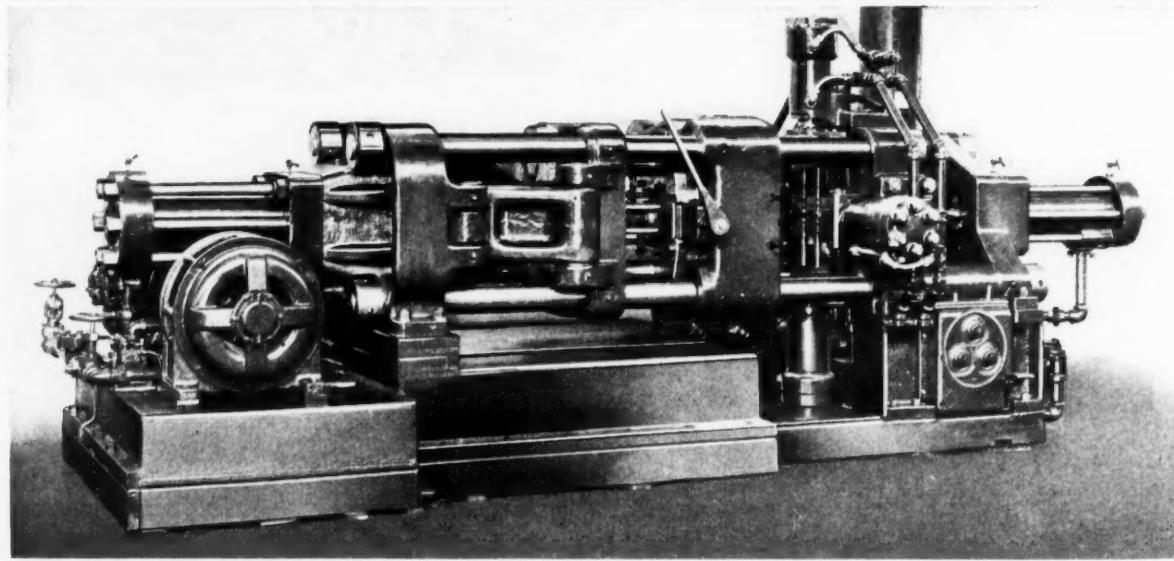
Reed-Prentice Brass Alloy Die-casting Machine of Latest Design
